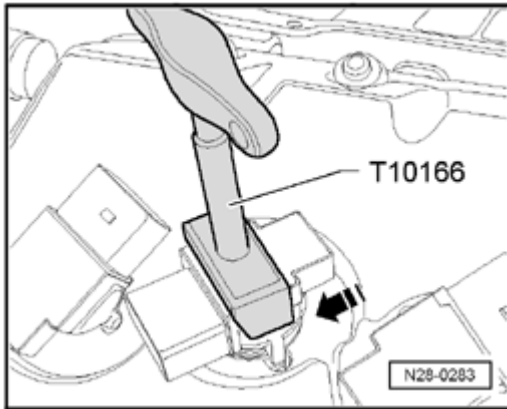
Removing Ignition Coils From Spark Plugs Using Ignition Coil Puller T10166
